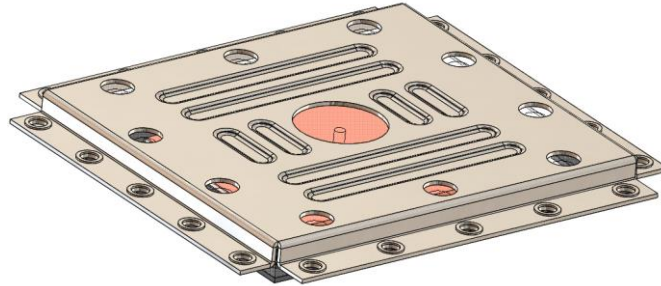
Clamping force assembly with bars element added to the clamping bracket
